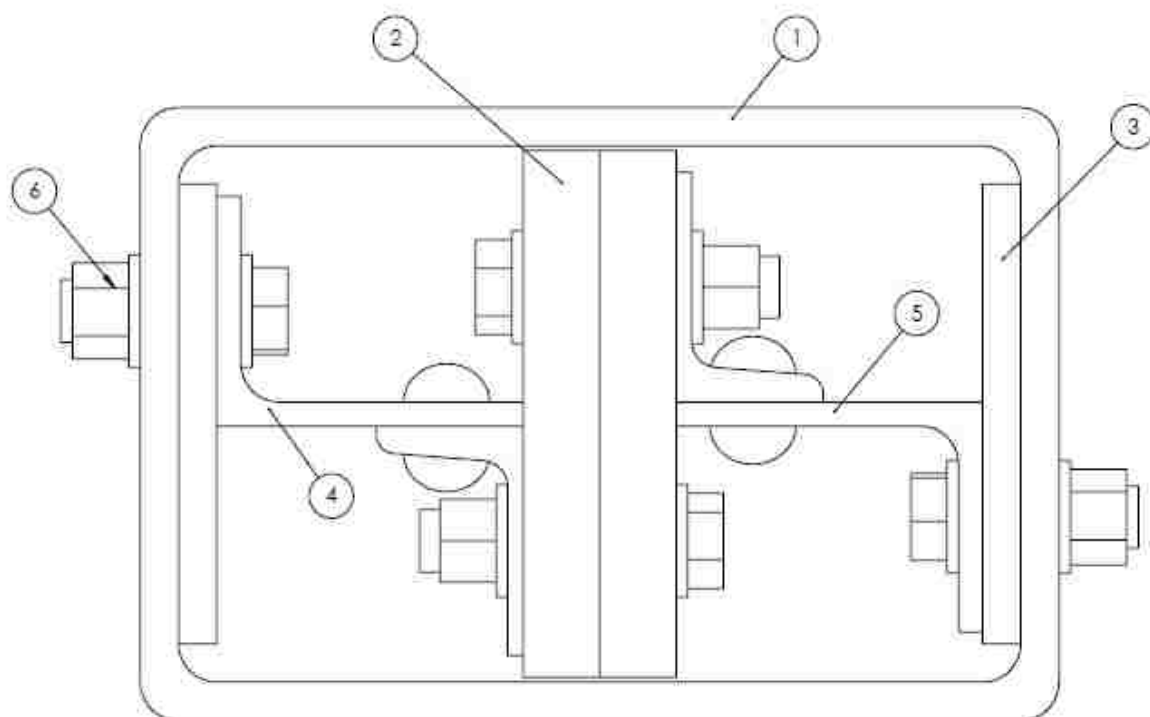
Cross Section of Baldwin Guardrail Configuration
